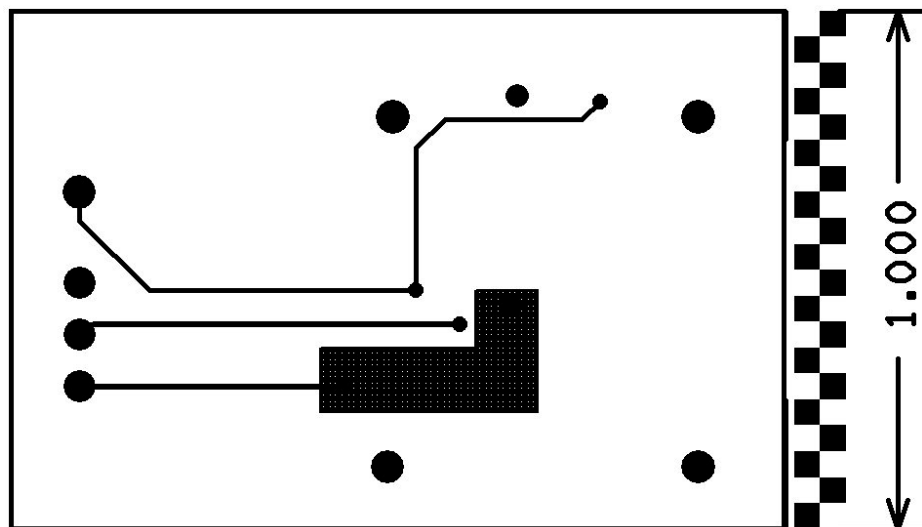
SP6648UEB PC LAYOUT BOTTOM SIDE
